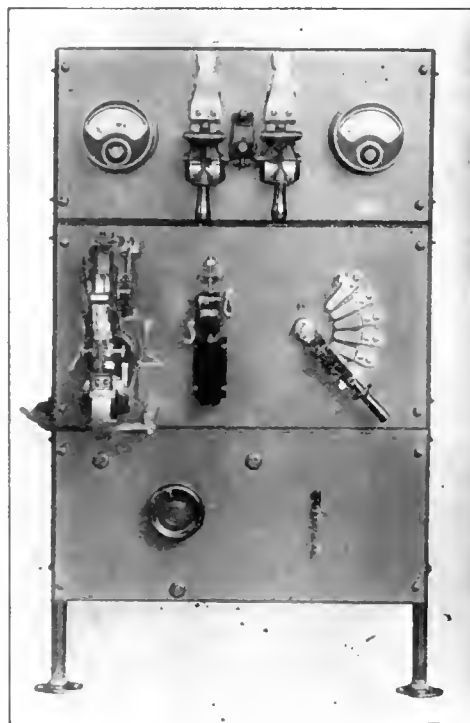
ARC WELDING GENERATOR PANEL.
